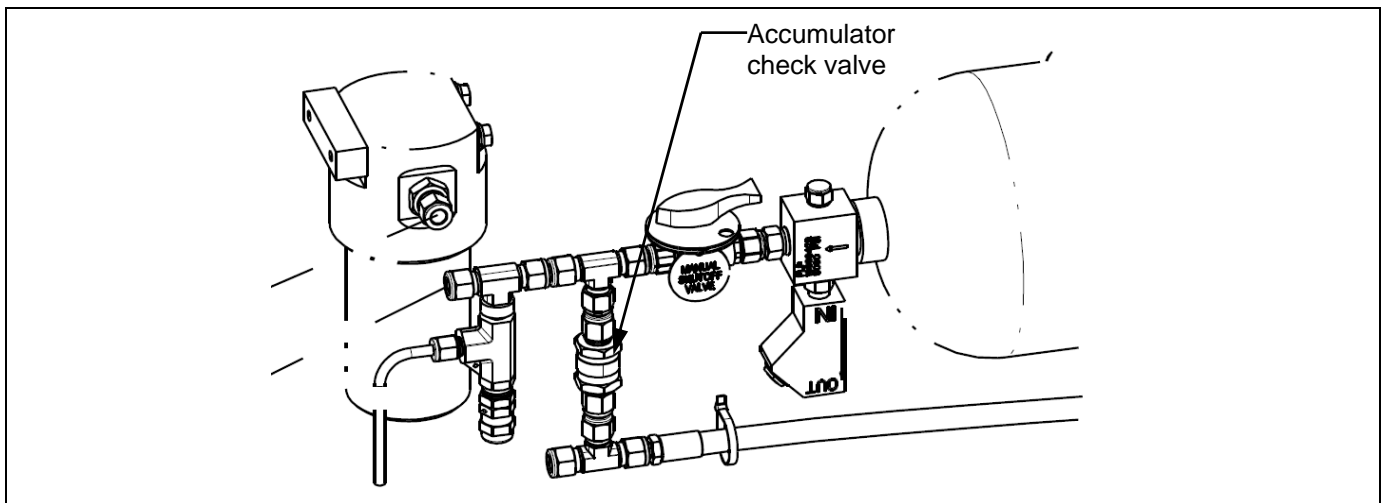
Accumulator check valve configuration (ADR80/02 build shown with check valve still installed).
